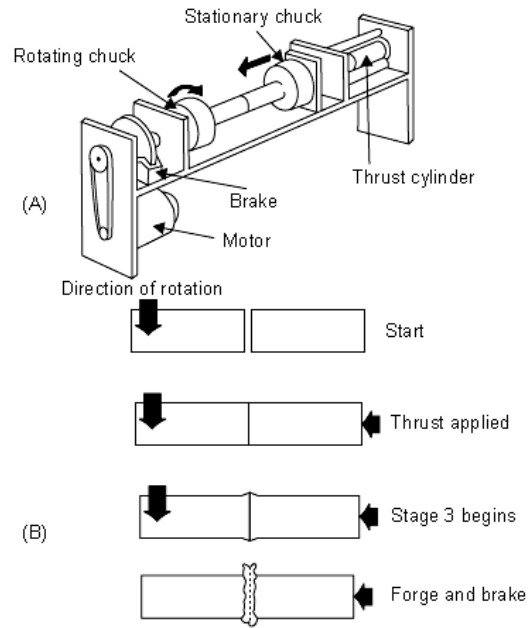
Friction welding (A) Equipment (B) Stages
